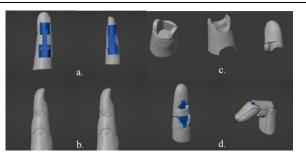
Custom finger prosthesis assembly. a. Fitting mechanism; b. Sectioning the finger; c. Creating space inside the finger for integrating the mechanism; d. Articulating the prototype using armatures
